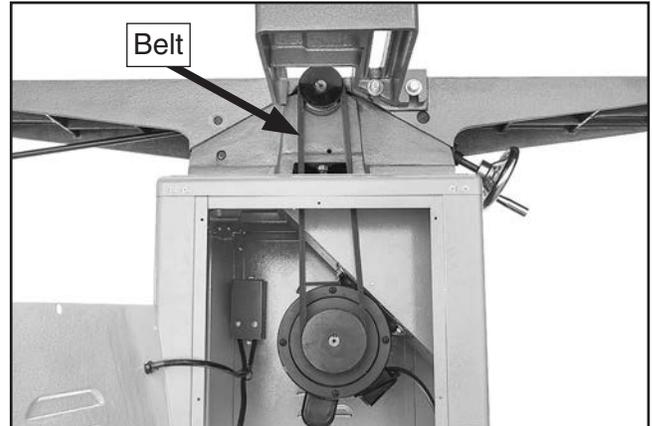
Example of belt installed onto cutterhead and motor pulleys.
